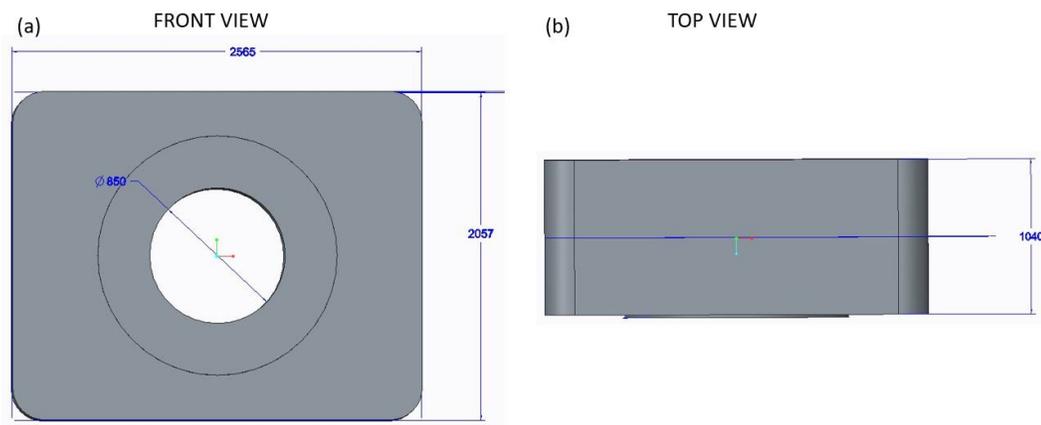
CT Machine dimensions (a) Front View, (b) Top View
